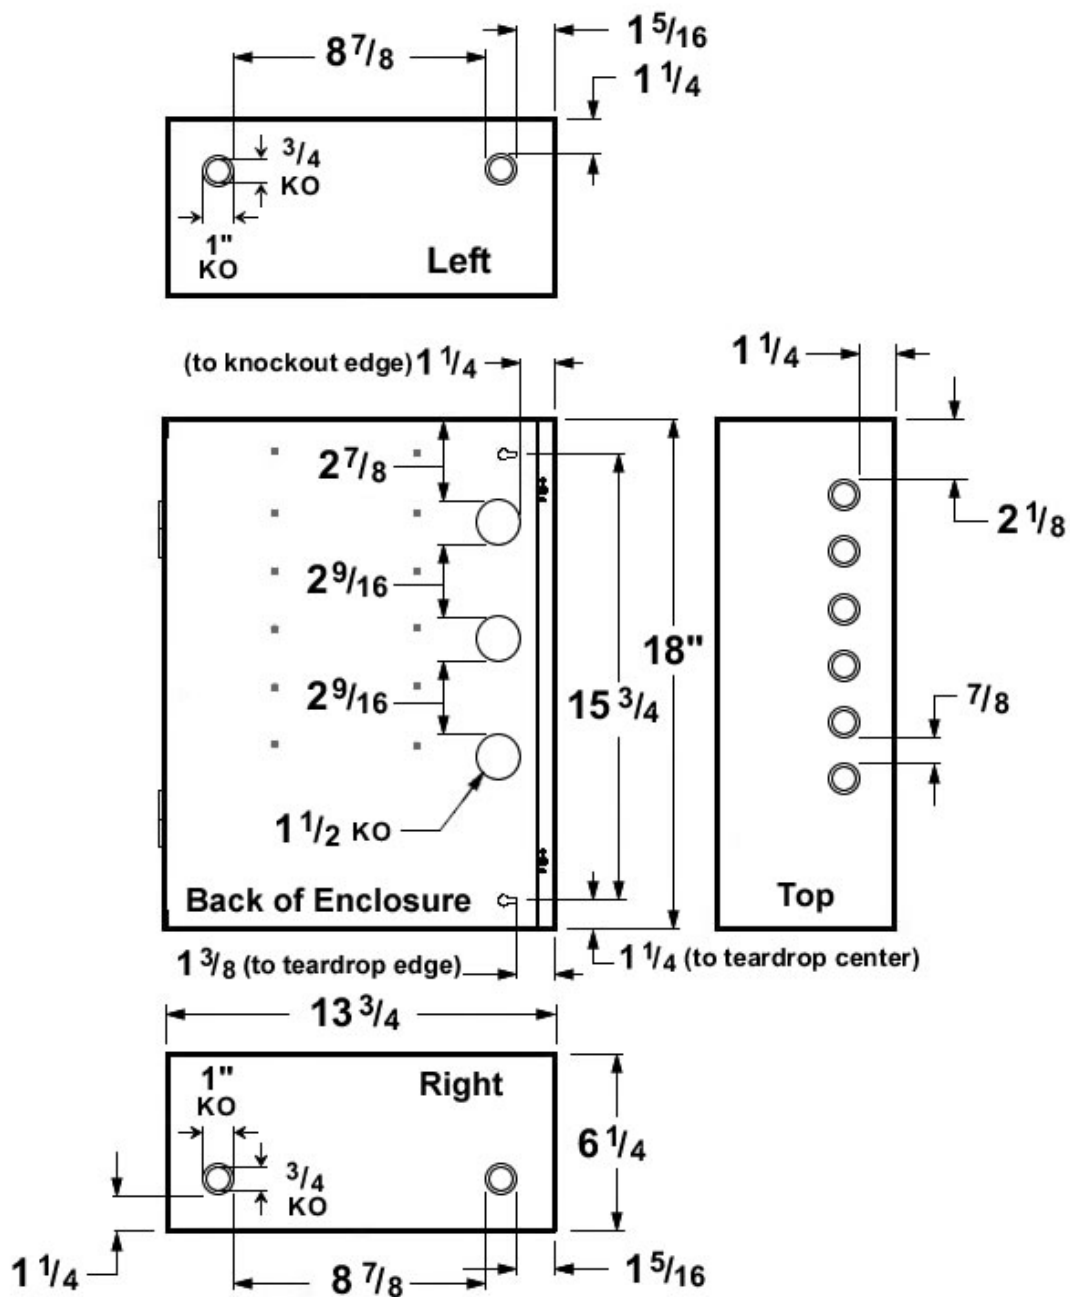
6xx-series Medium Controller Dimensions & Knockout Diagram:
